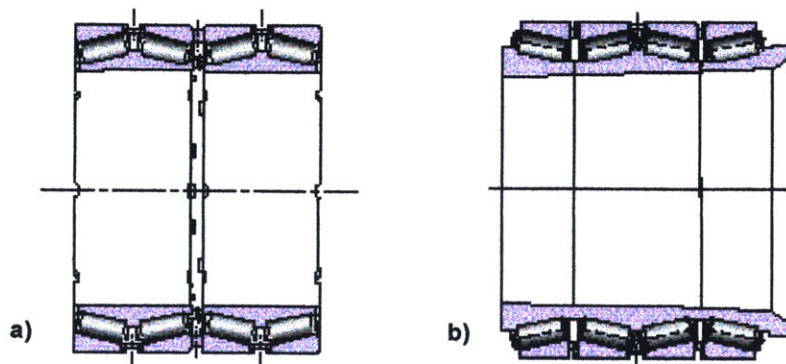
Four-row tapered roller bearings. Source: The Timken Co.
